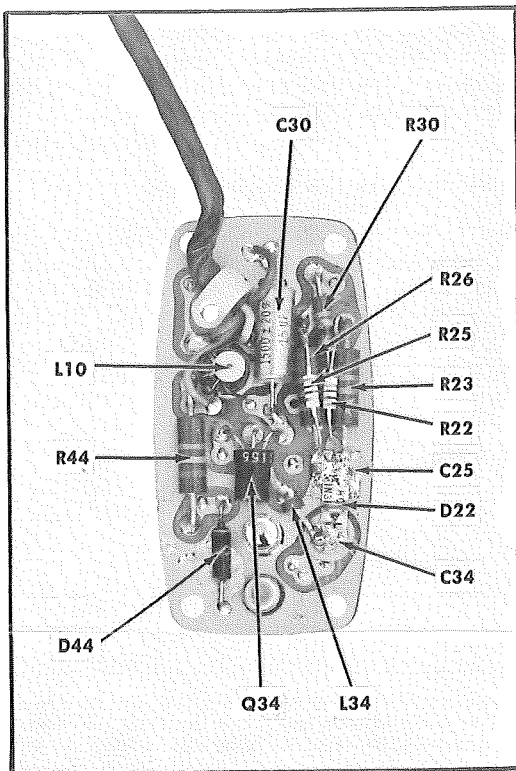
Component locations on back side of etched-wiring circuit board.
